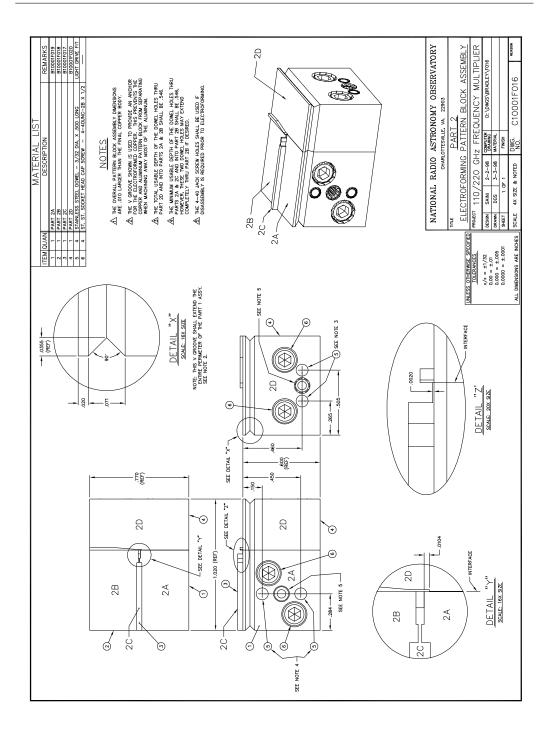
110/220 GHz frequency doubler: Assembly of the mandrel components 2A through 2D. This mandrel was used for electroforming part 2 of the split block.
